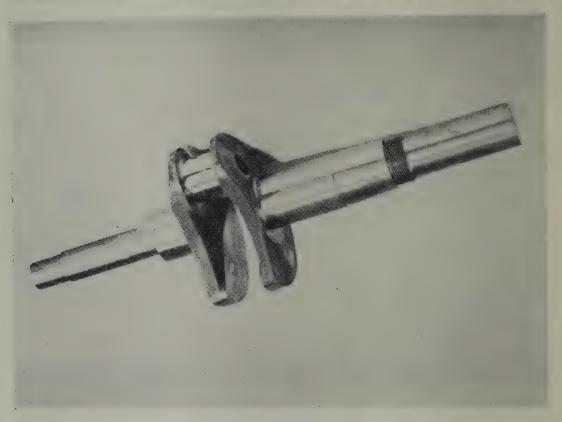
SINGLE THROW CRANKSHAFT, CAST IN S.G. IRON (Courtesy: Sheepbridge Engineering Ltd., England)
